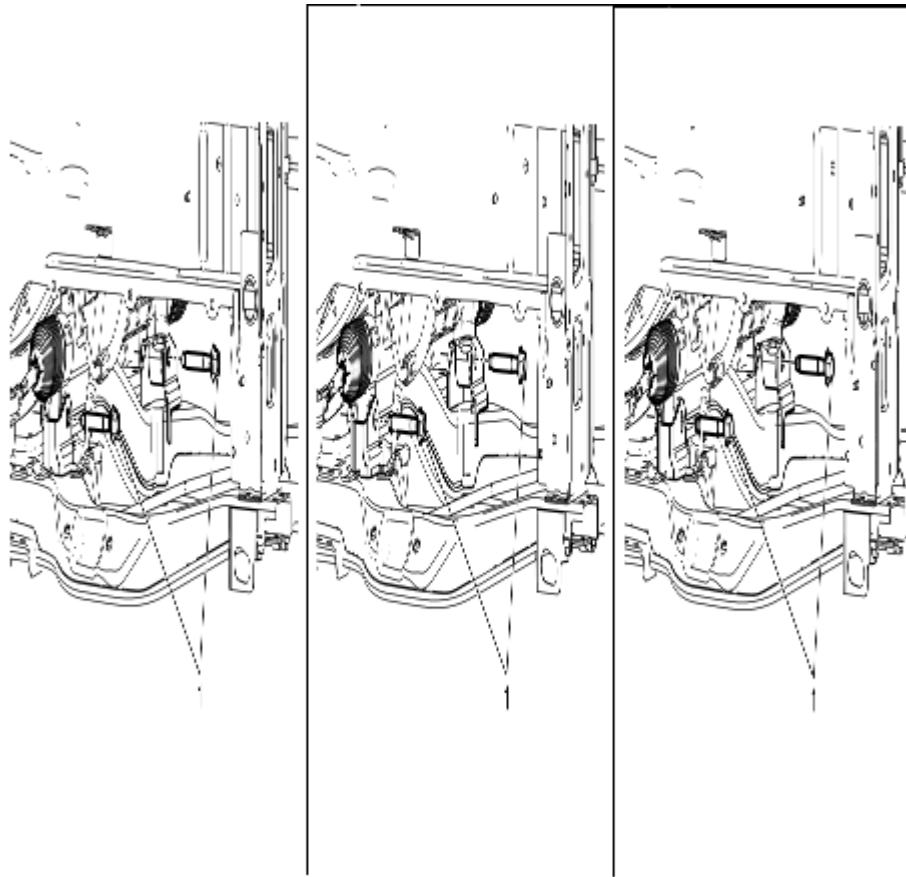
Steering Gear Assembly And Frame Retaining Bolts
